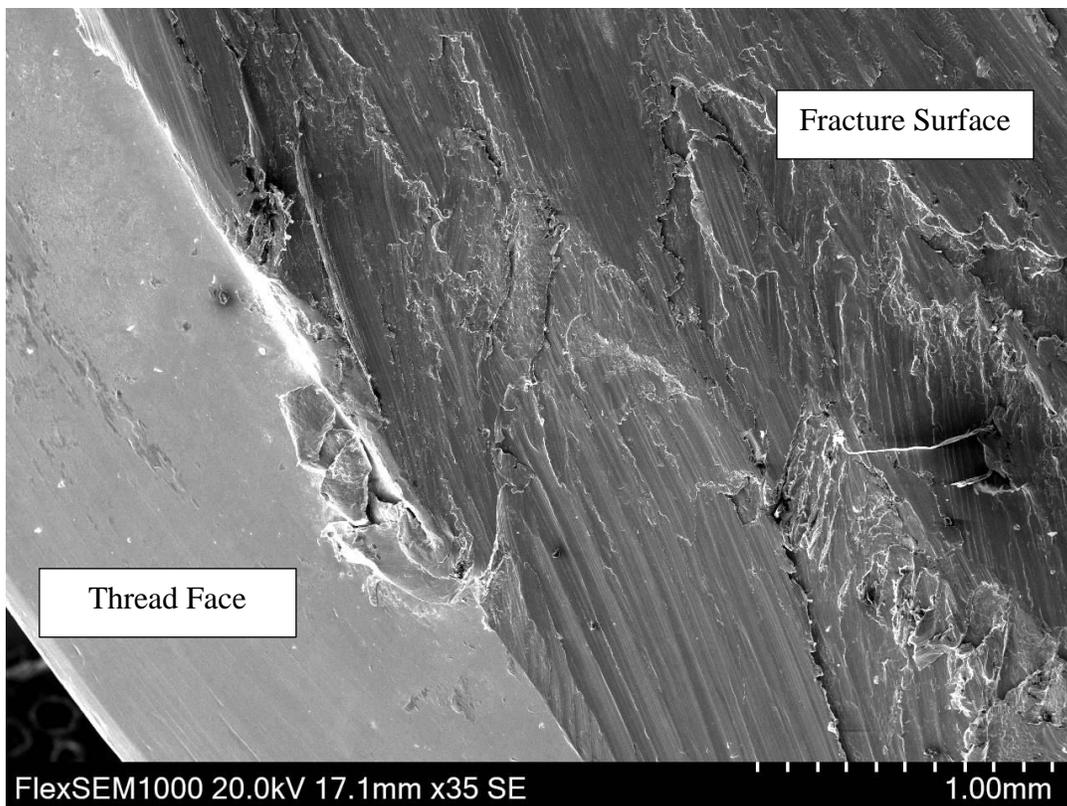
FRACTURE SURFACE AND THREAD FACE, BOLT C5
